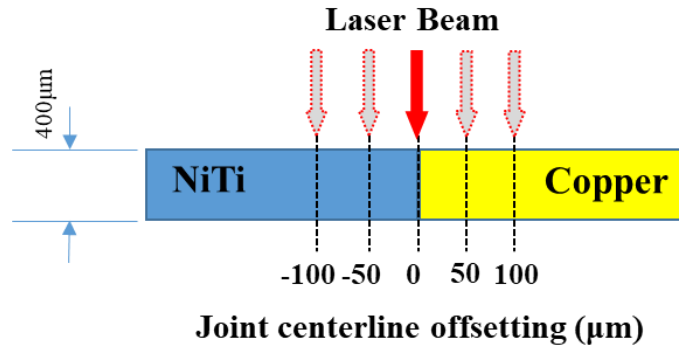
Schematic of the laser welding process with different laser offsets.
